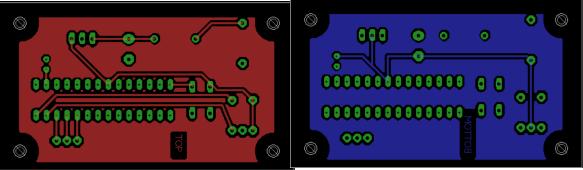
Final PCB design of transmitter, showing All layers, TOP side and BOTTOM side.
